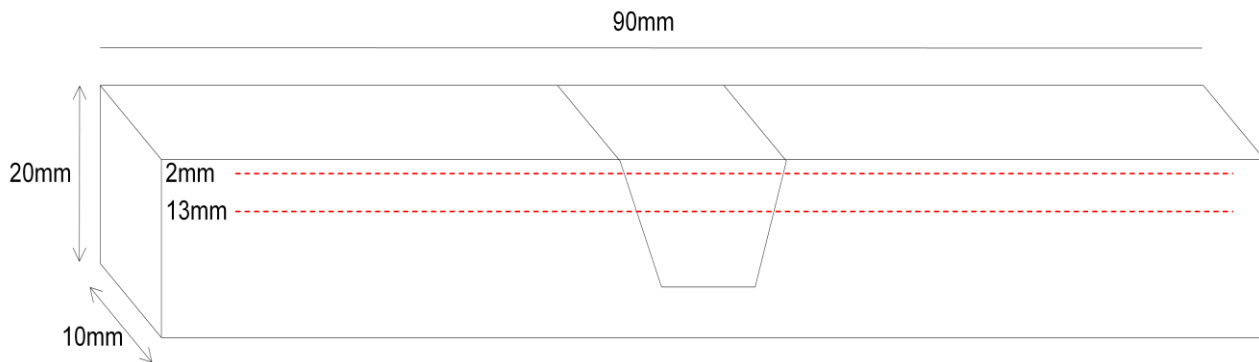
Schematic diagram of FSW test specimens, showing depths of immersion testing at 2mm and 13mm from the surface
